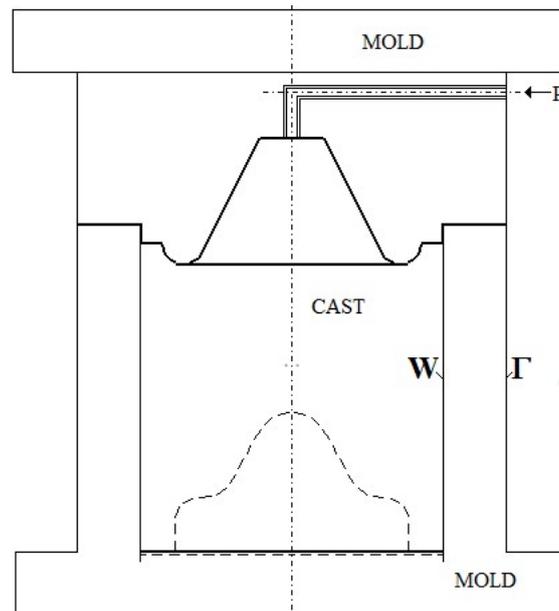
General geometric scheme of the gas pressing (GP) method: cylindrical CAST, MOLD and boundaries surfaces W (working) and external Γ (mold/environment); P is pressure [9, 10].
